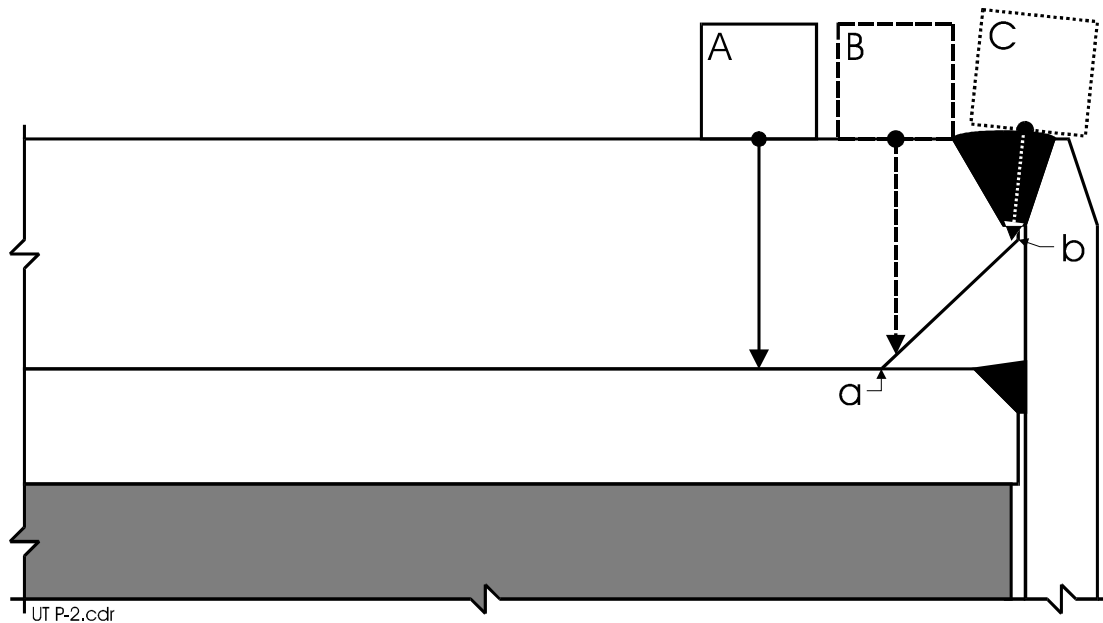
Weld Crown (Reinforcement) Challenge to Straight Beam UT Examination
